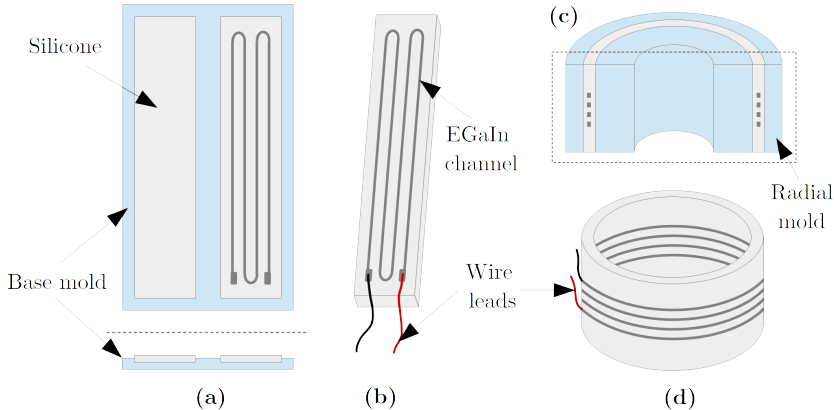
Sensor fabrication process: (a) cast two sensor layers; (b) bond layers, inject with EGeIn, and cast in cylindrical mold. For radial sensor, (c) bond sensor ends with silicone in mold. (d) Radial sensor band.
